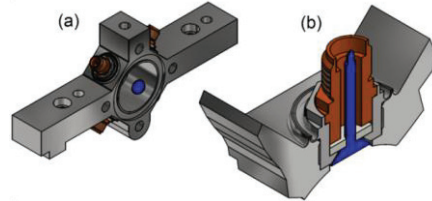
First Sirius BPM Prototype of the Bell-Shaped Button. a) BPM Assembly in the perspective view. b) One-half of the BPM Button located on the circular vacuum chamber (zoomed part).
